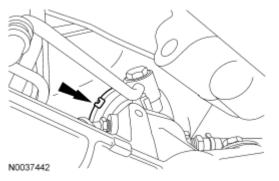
Locating Steering Gear-To-Dash Seal Clips Courtesy of FORD MOTOR CO.
